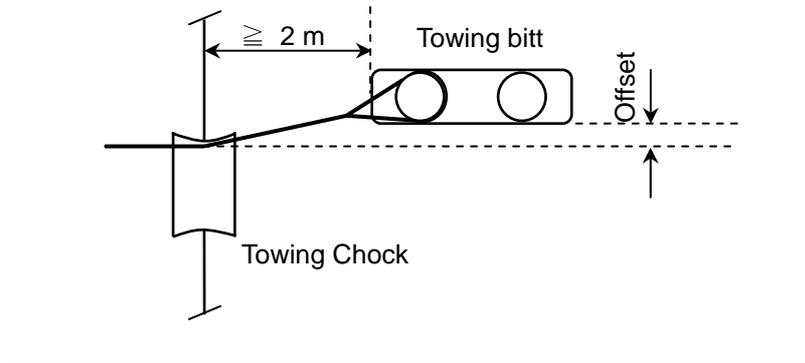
Sample Arrangement of Towing Fittings
